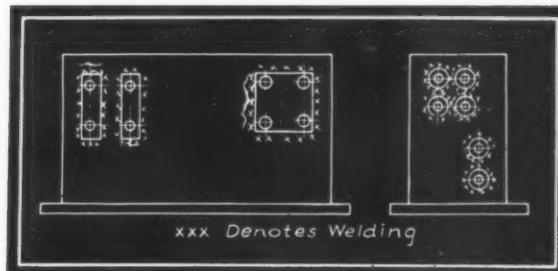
Several circular welded pads, right, do not stress metal as much as large rectangular ones, left
